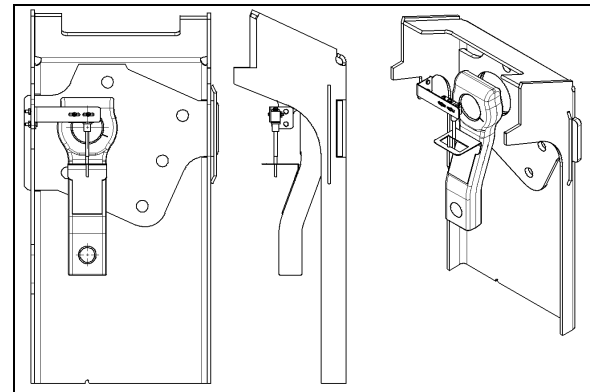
TAG AXLE UNLOADING SWITCH ADJUSTMENT 14061
